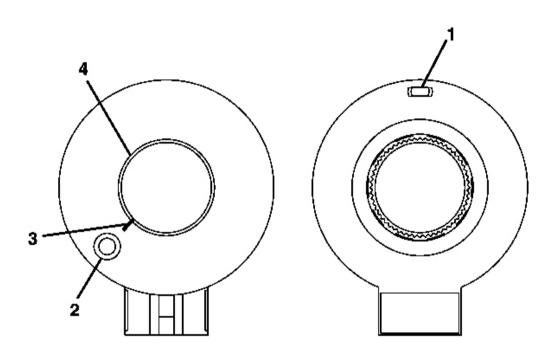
Steering Wheel Position Sensor Center Pin, Rotor Flange Cuff And Installation Alignment Mark
